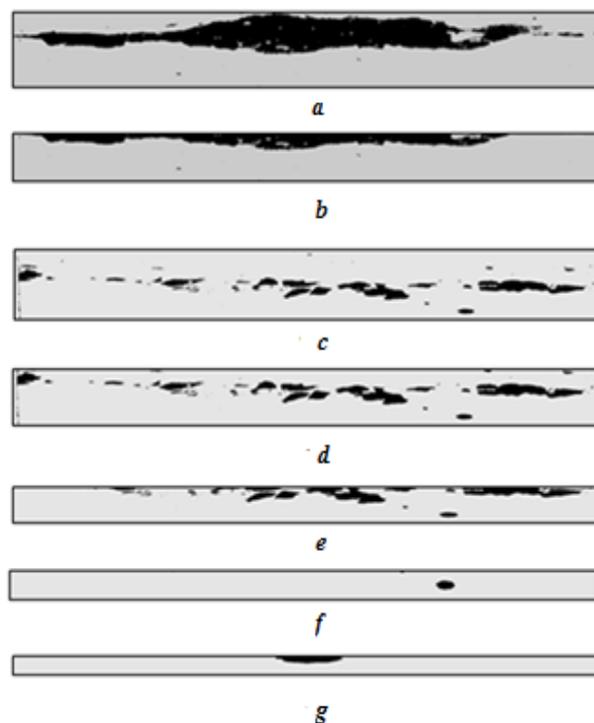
Mechanism of transformation of ingot defects into surface defects in sheet metal:
